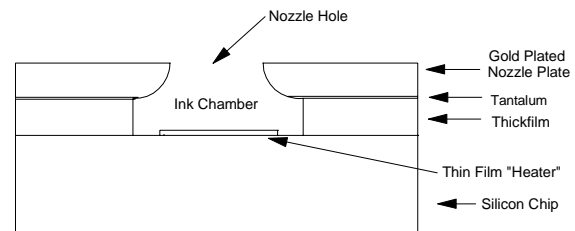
Cross section of 1100 series chip/nozzle plate assembly
